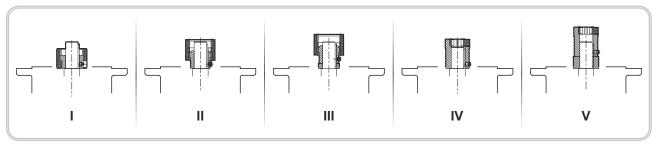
Measurement of Gear Sleeve Wear for Gear BoWex® Couplings
